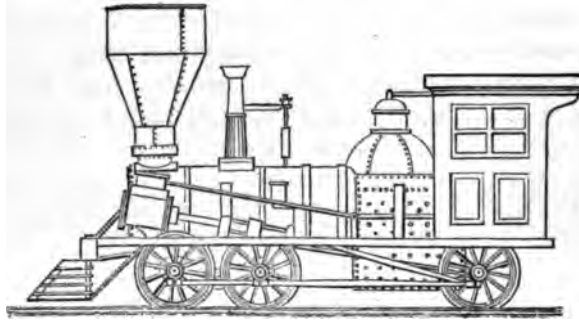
BALDWIN SIX-WHEEL CONNECTED LOCOMOTIVE
